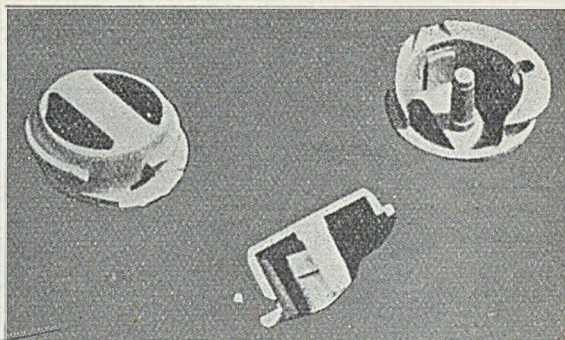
Group of Sewing-machine Components produced by Precision Investment Casting.
